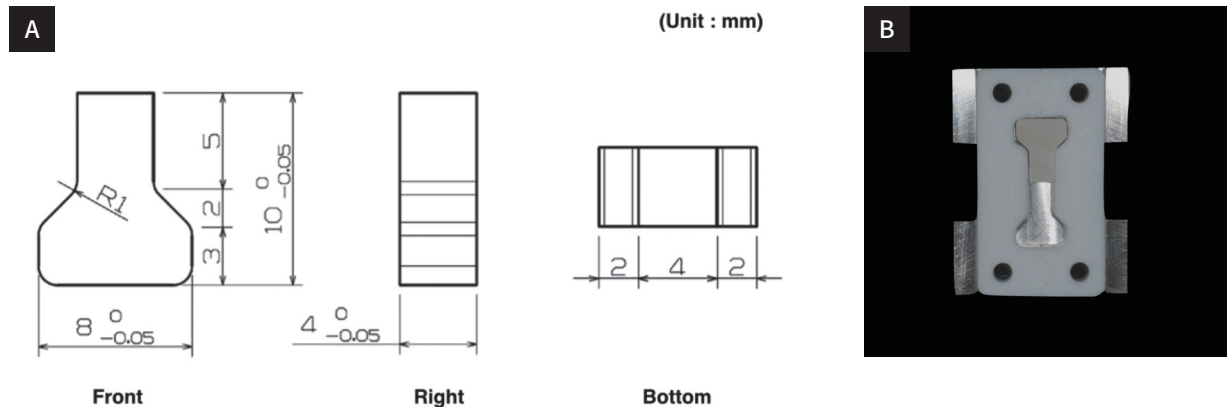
(A) Schematic image of specimens, (B) Customized jig for specimens.
